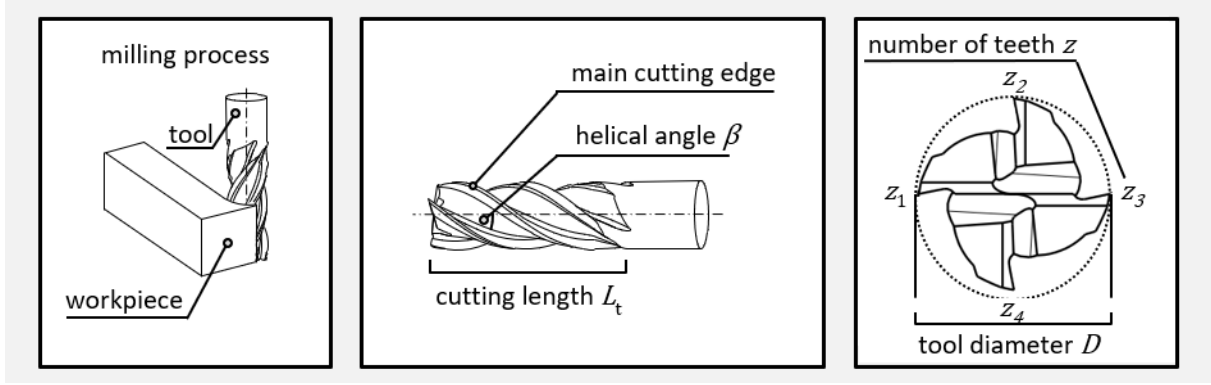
Solid carbide end mills with continuous cylindrical shank according to DIN 6528
